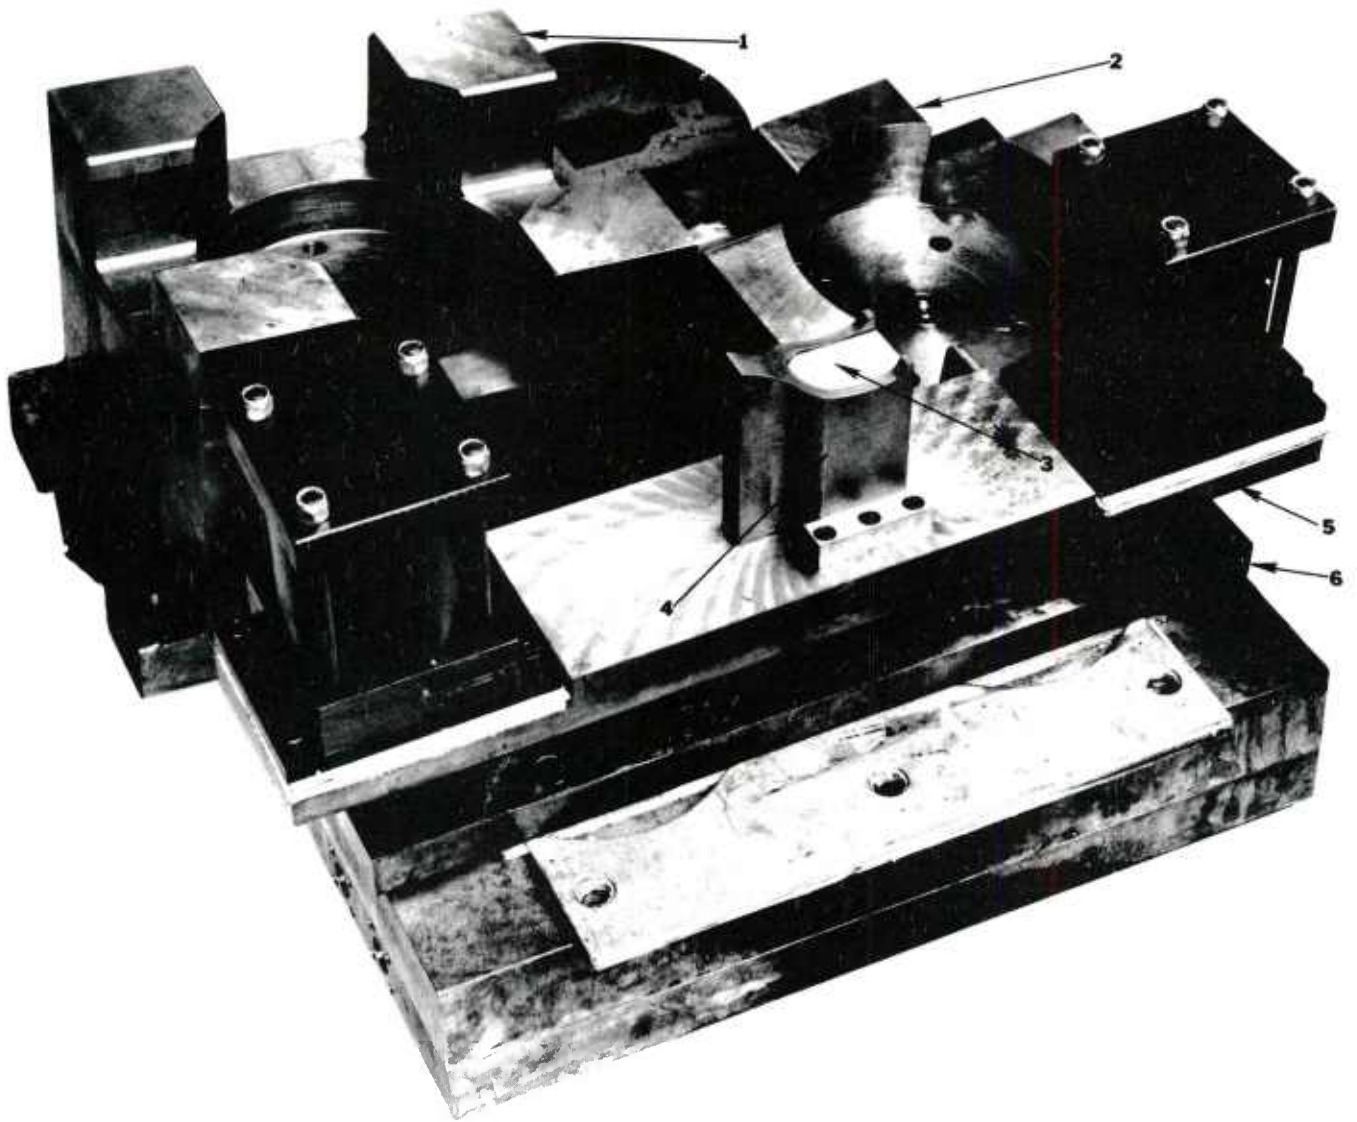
Partially Assembled Hammer Forging Die Set Showing:
